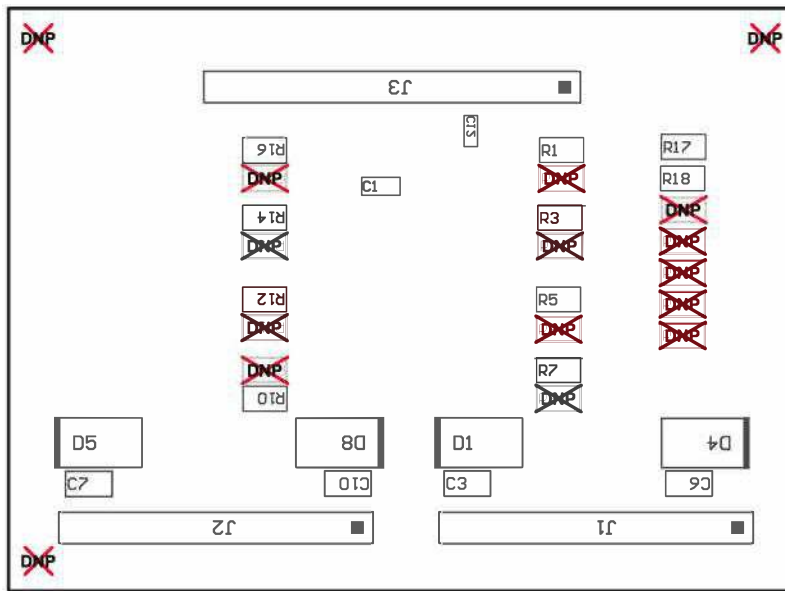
TPS23882B1EVM-008 (Daughterboard) Bottom Side Assembly
